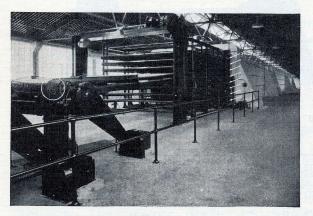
An installation of 9 "Stearns High Duty" Magnetic Clutches on wet board sawing machines, two-speed tipple and two-speed dryers.
